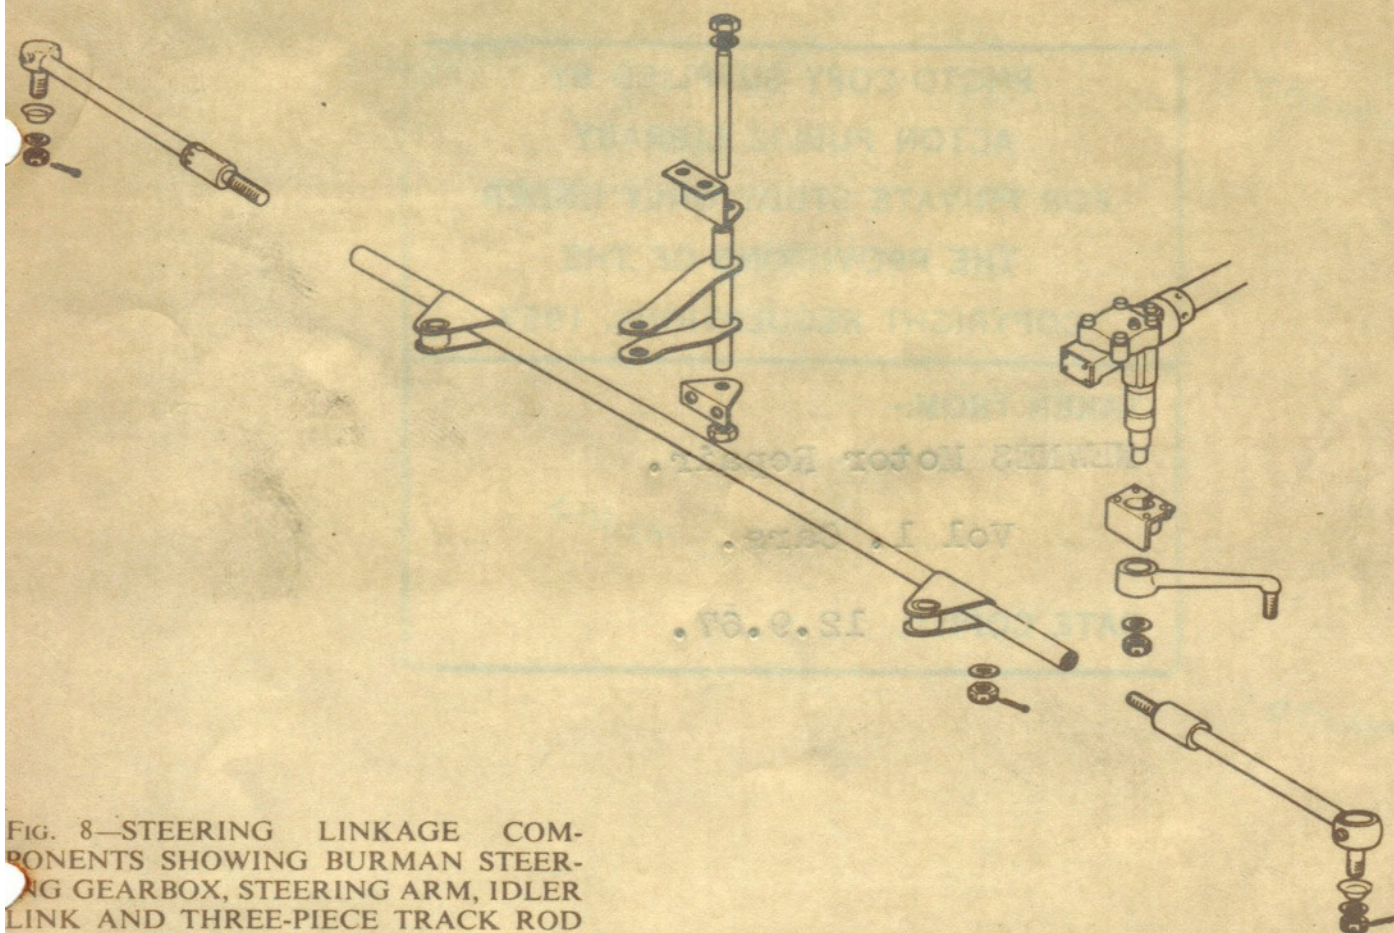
STEERING LINKAGE COMPONENTS SHOWING BURMAN STEERING GEARBOX, STEERING ARM, IDLER LINK AND THREE-PIECE TRACK ROD
